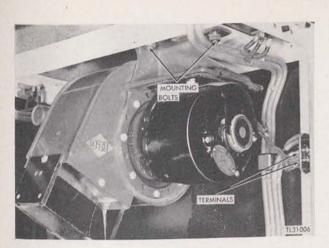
Transmitter BC-785-A, showing location of blower 19.
